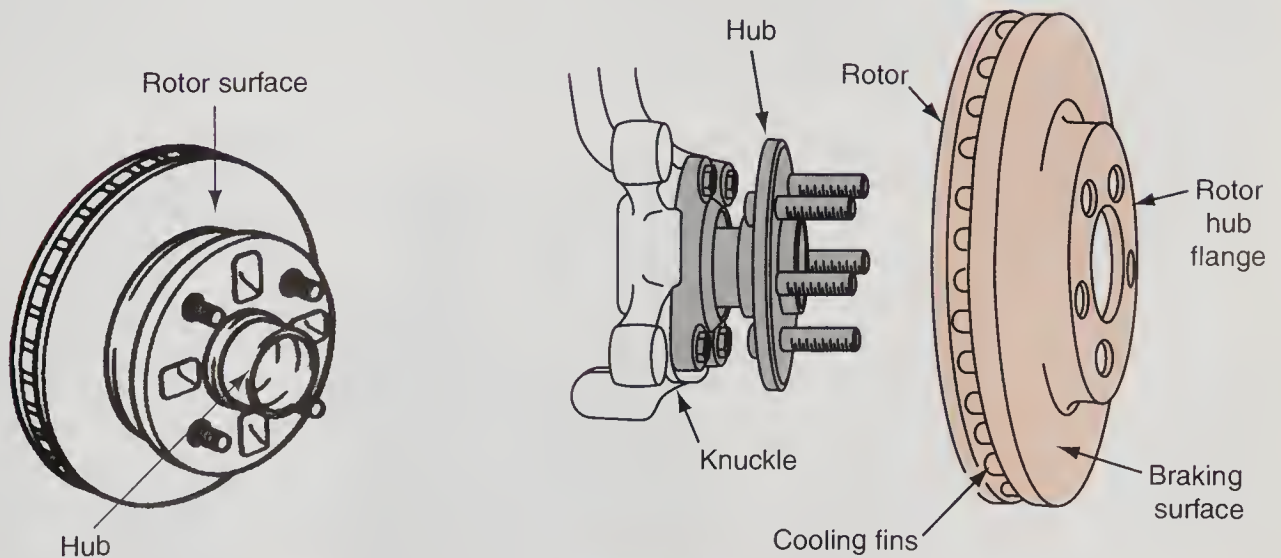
The wheel hub and the rotor are cast as a single part in a fixed or integral rotor.
